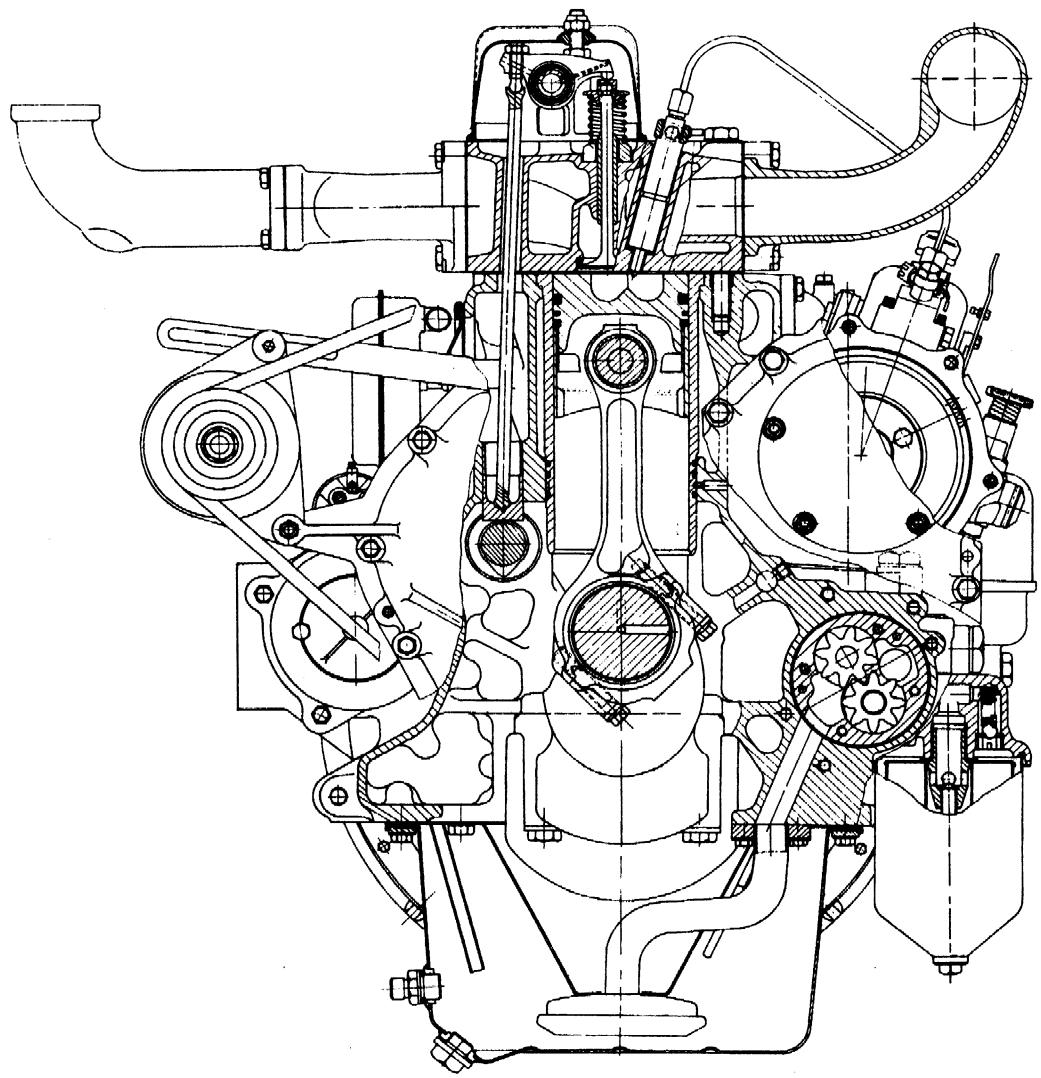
Crcss sectional drawing for R4100 ,R4105 diesel engine
